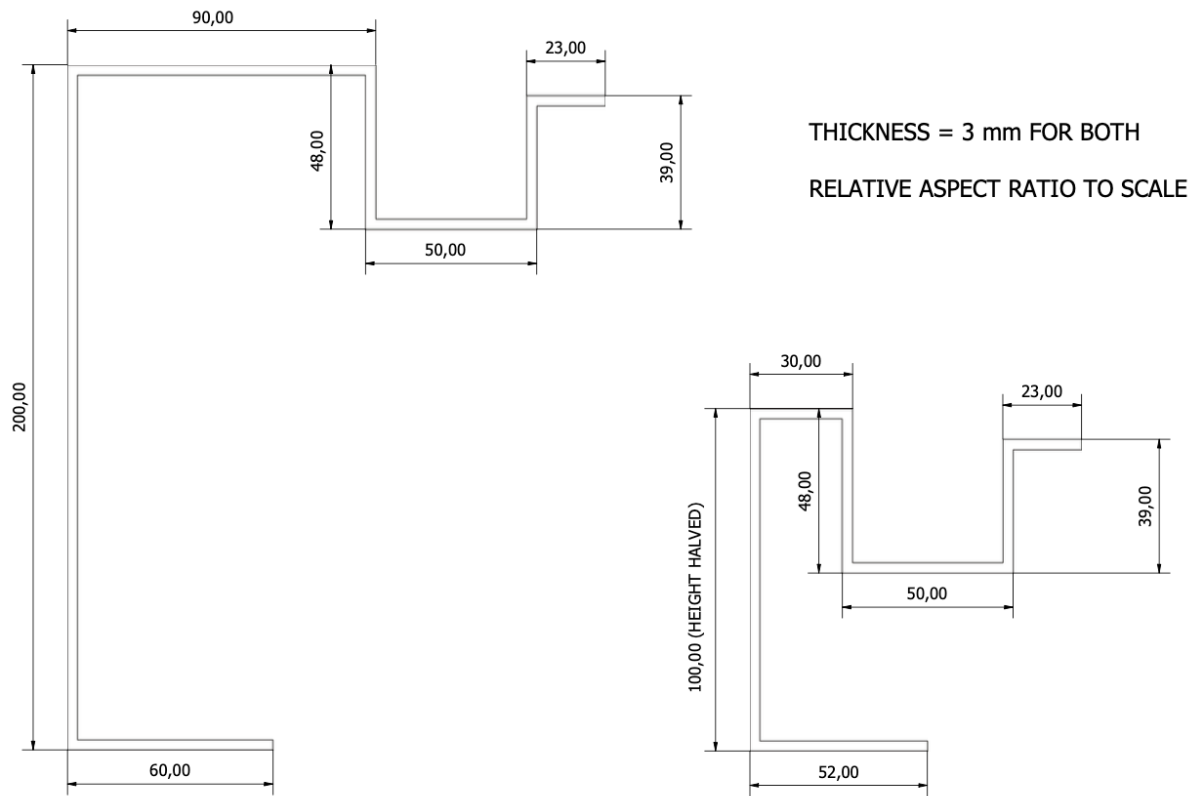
Left: original cross section for the main side plates on the frame. Right: New dimensions based on TKS AGRI's provided dimensions used in the optimized frame. Drawing produced in Autodesk Inventor Professional [15].
